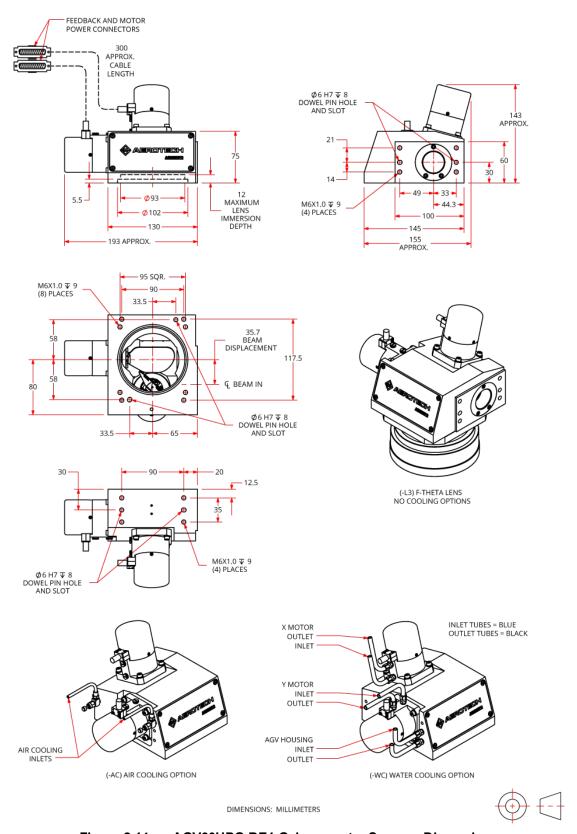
AGV30HPO-BE1 Galvanometer Scanner Dimensions
